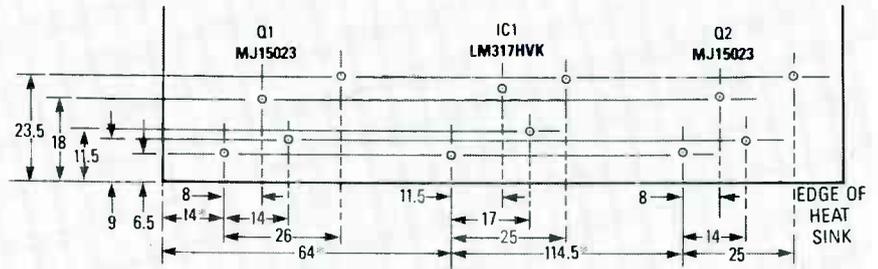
POWER SUPPLY HEAT SINK LAYOUT. All marked dimensions are in millimeters, all mounting holes are 1/4-inch in diameter, all lead holes are 3/16-inch in diameter, and add 3 mm to all dimensions with an (*) to align the PC boards.
